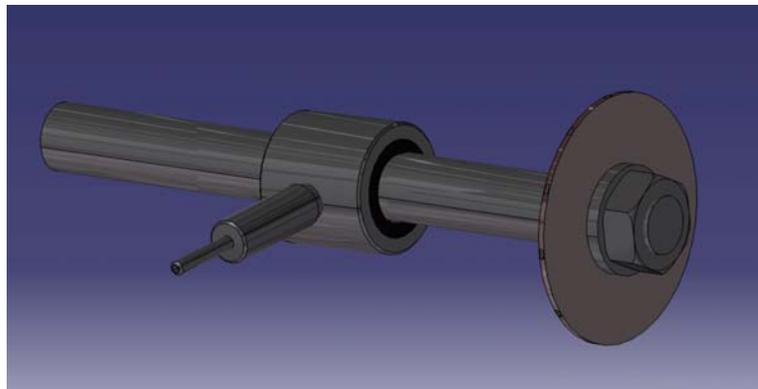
Stratified disk assembly, shaft, sleeve for introducing the working fluid inside OT
